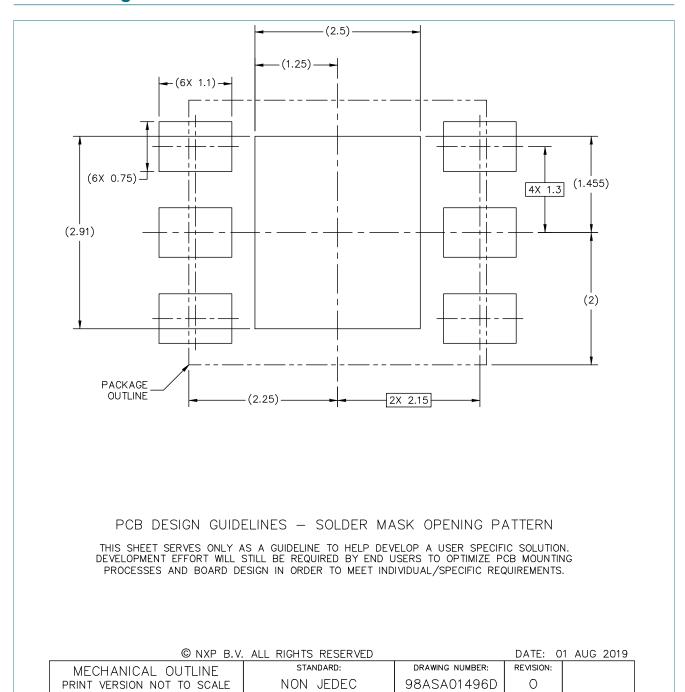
Reflow soldering footprint part1 for HLSON6 (SOT2040-1)
